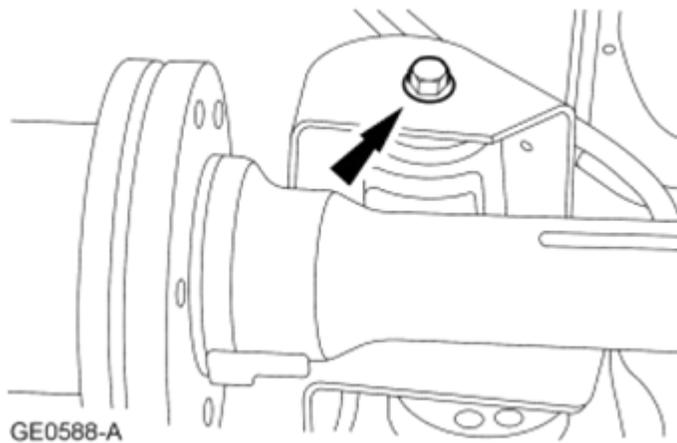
Locating Axle Shaft Housing Carrier Bushing Bolt
